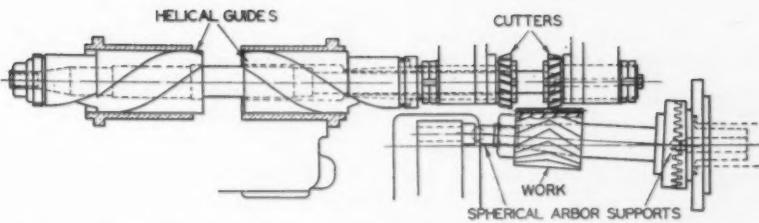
Set-up for cutting tapered gears, tapered spline shafts or plain conical surfaces.
